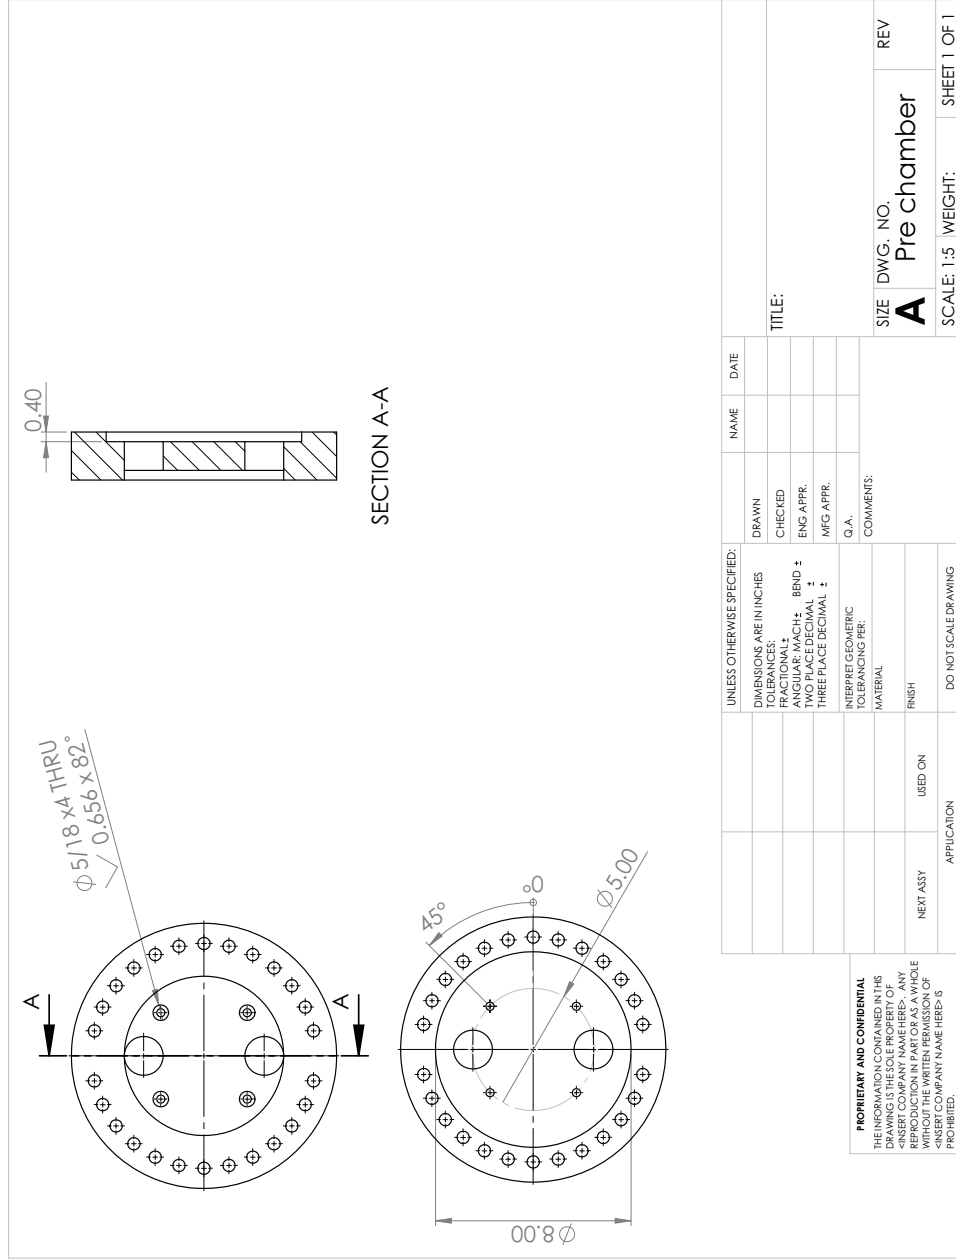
Pre-chamber front cylinder block pocket drawing to fit in the A2 tool steel wear plate
